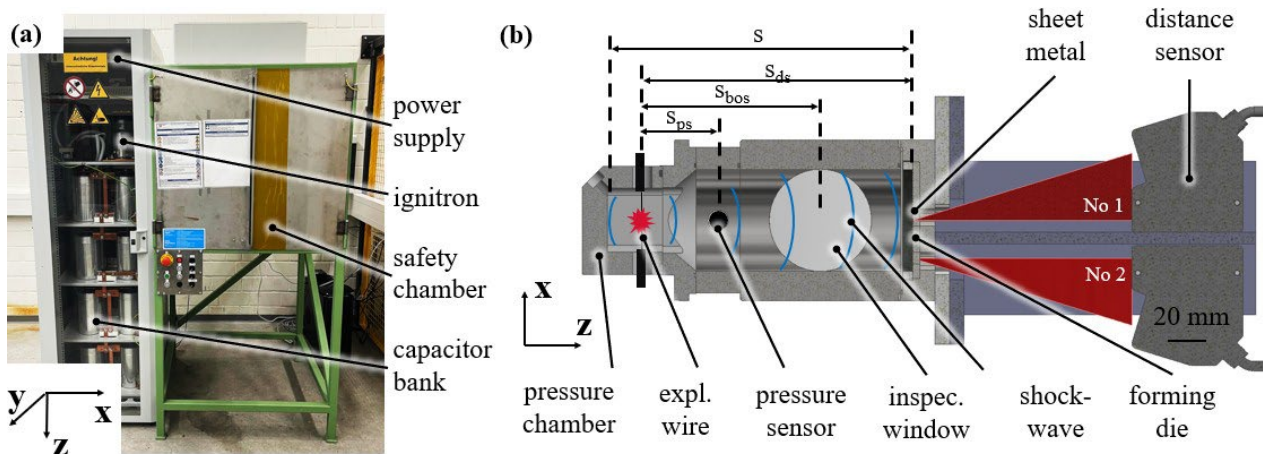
Testing set-up: (a) pulsed-power machine, (b) cross-sectional view of pressure chamber assembly
